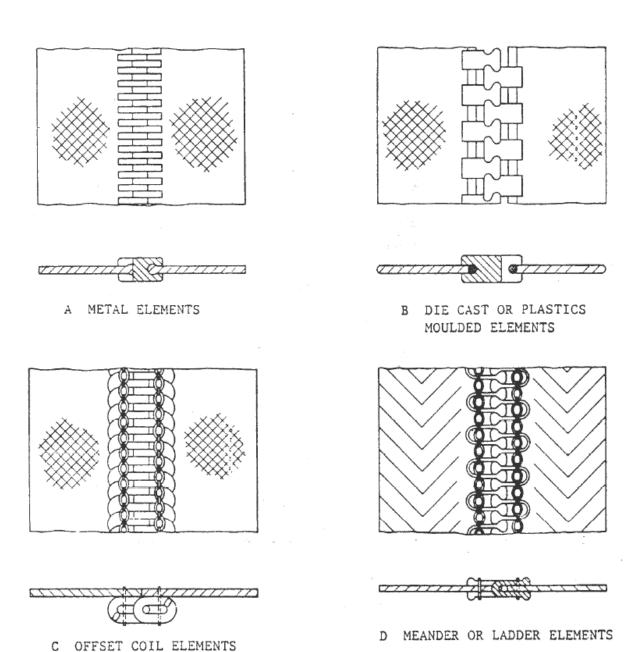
FASTENER CHAIN CONSTRUCTIONS
